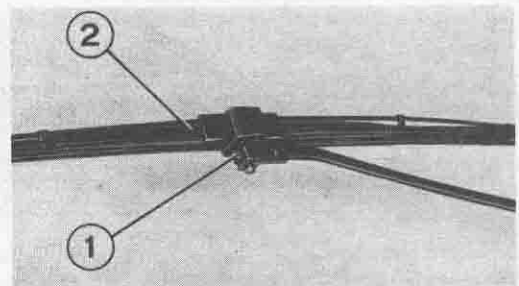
Removing the wiper blade from the arm (Sec 50)
